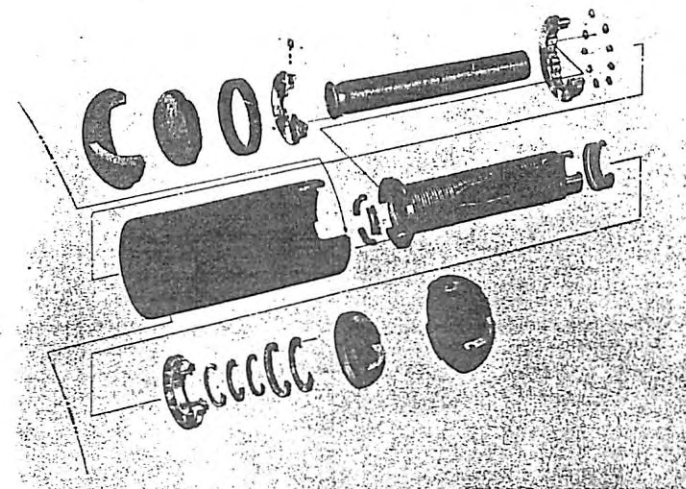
Exploded View of GLFC with Beryllium Oxide Secondary Shield
